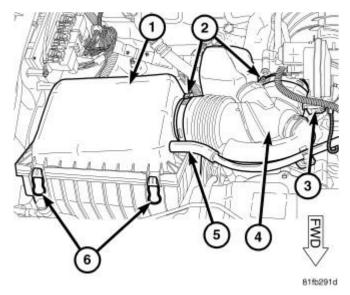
Air Filter Housing Courtesy of CHRYSLER LLC
